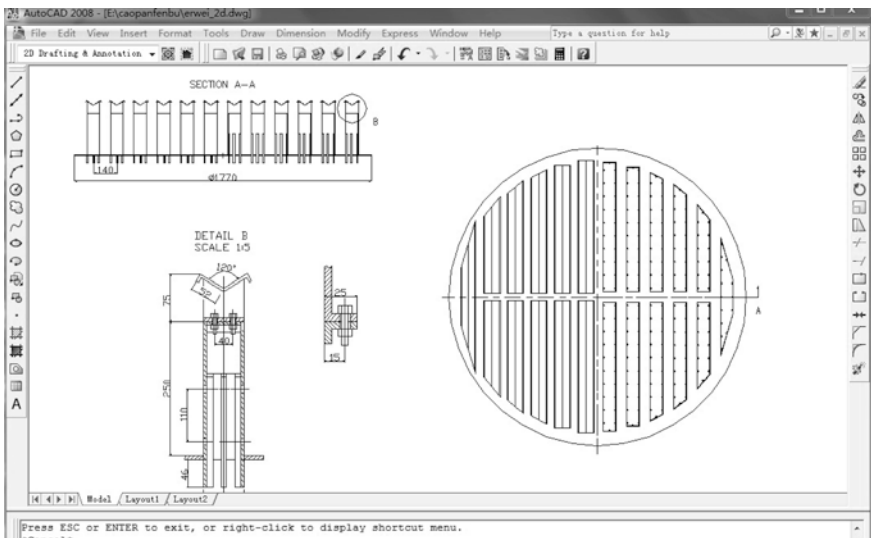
Top view, front view and detail drawings of the chimney-tray gas-liquid distributor
